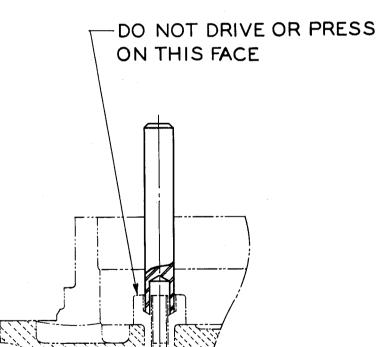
55241 CLUTCH SAFETY PLUG DRIVE PUNCH
